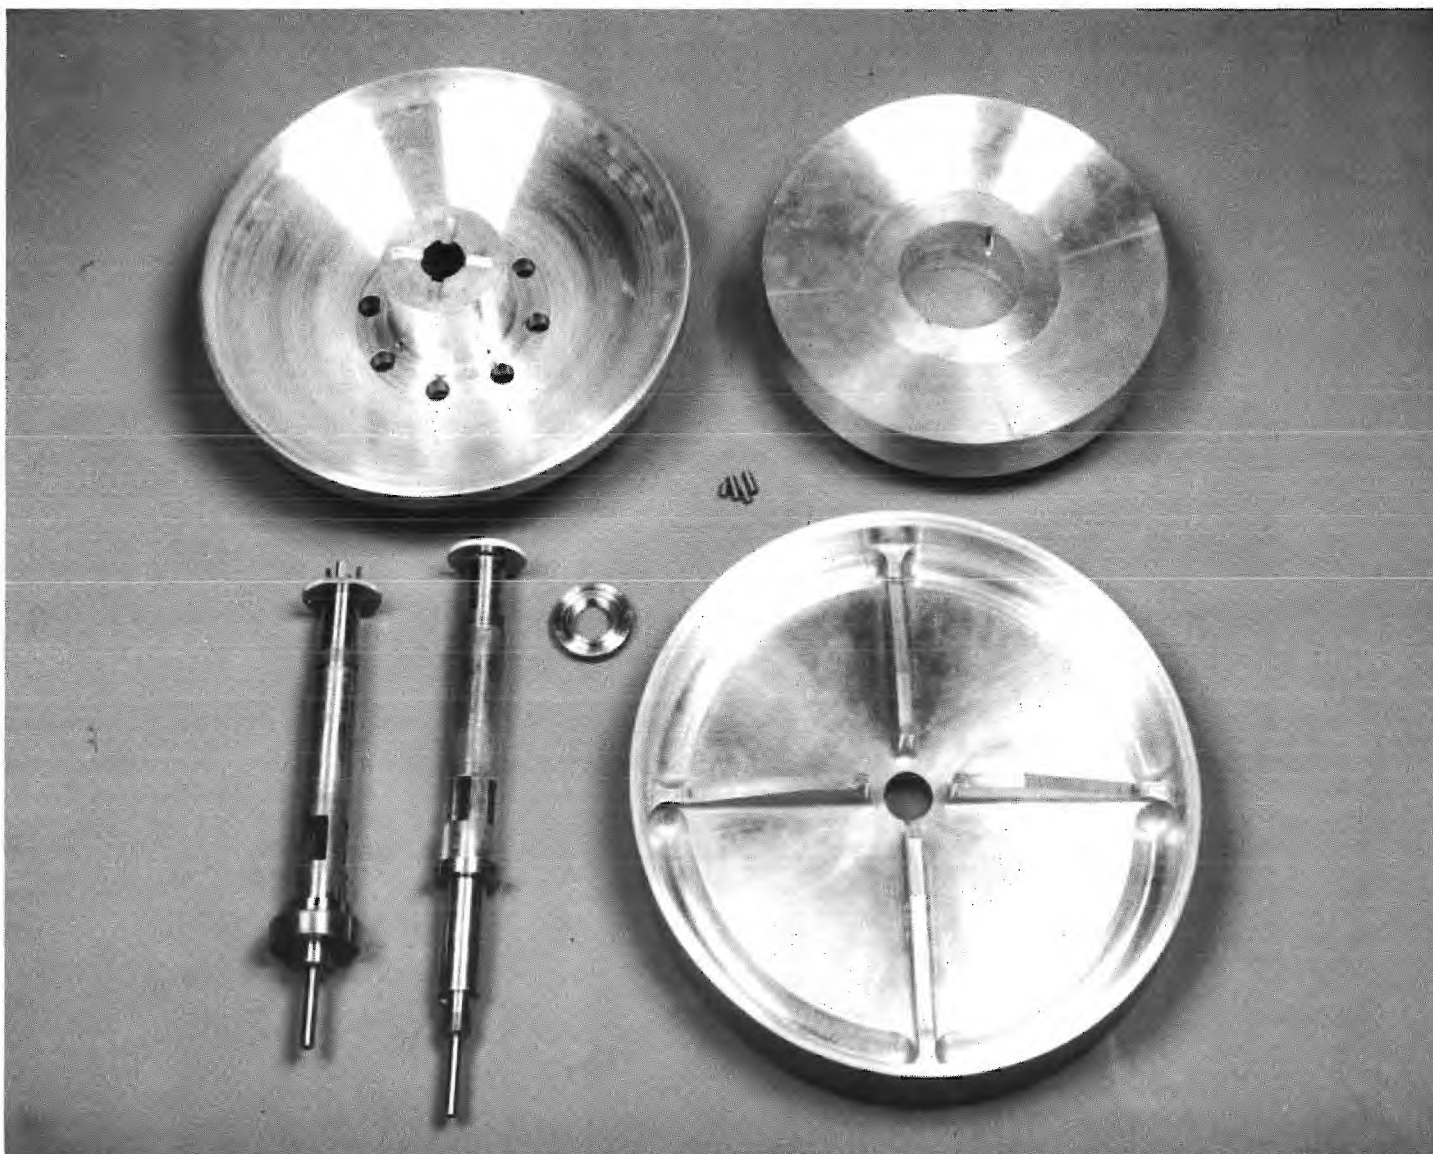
Centrifugal Separator Rotor Components and Shafts.
